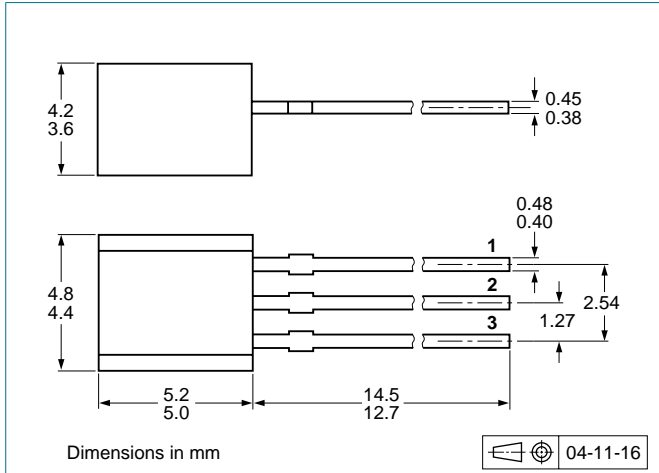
Package outline SOT54 (SC-43A/TO-92)
